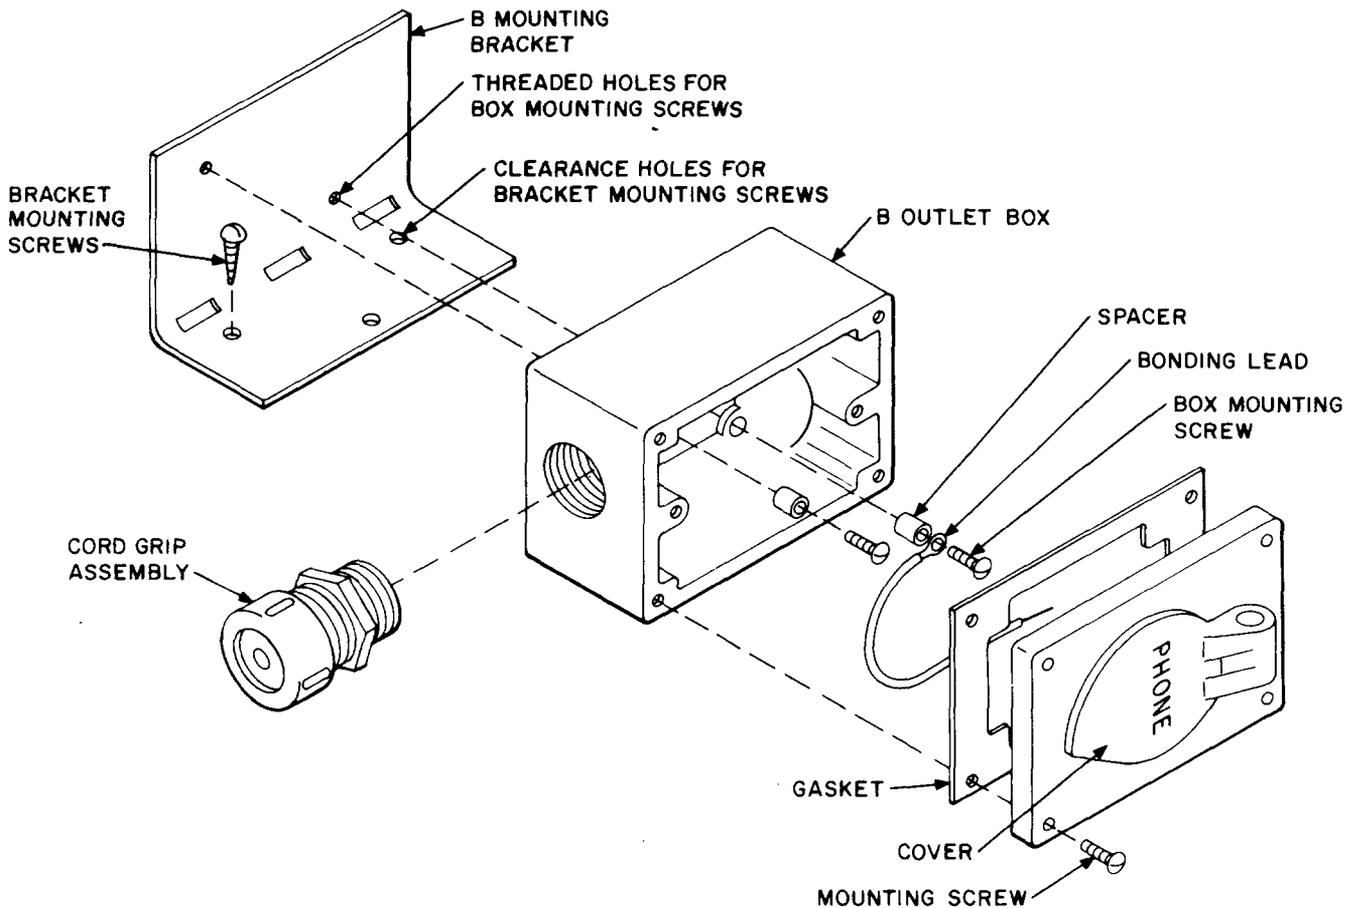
Assembly of B Weatherproof Male Jack to B Outlet Box and B Mounting Bracket
